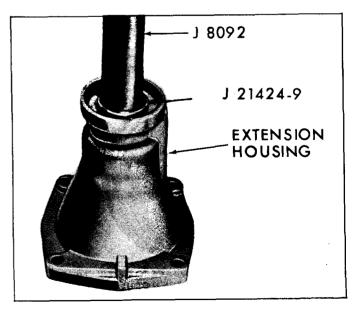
G-134 Removing or Installing Extension Housing Bushing
